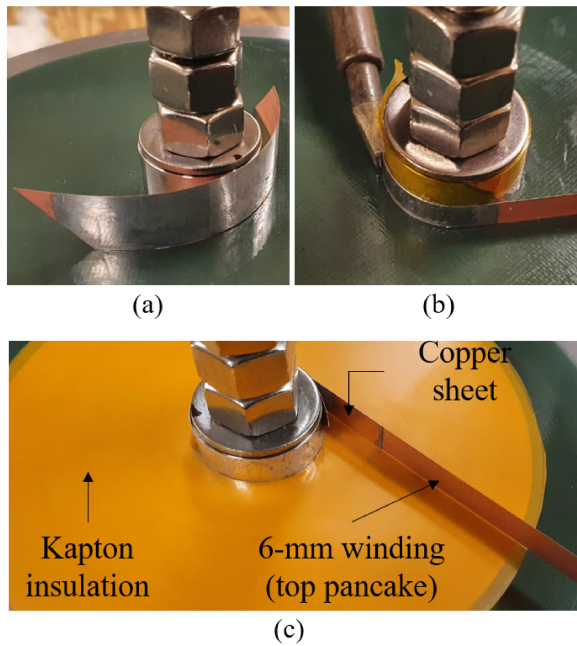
The inner joint. (a) is a pre-tinned 12-mm trapezoid bridge tape, (b) is the bottom joint process, (c) is the top joint process.
